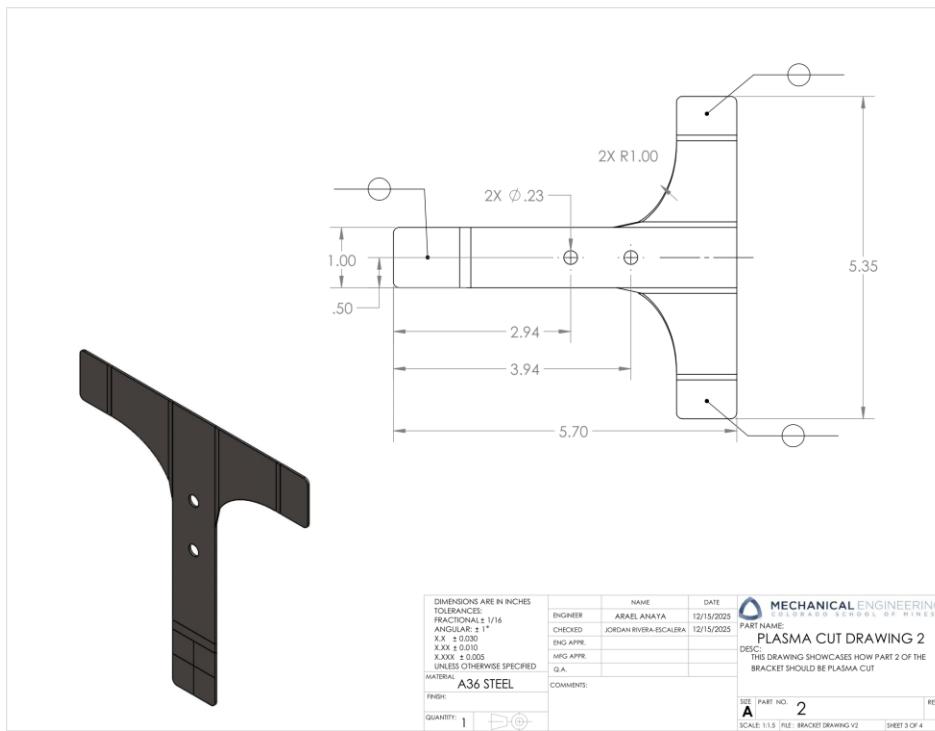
Part 2 Plasma Cut Drawing
